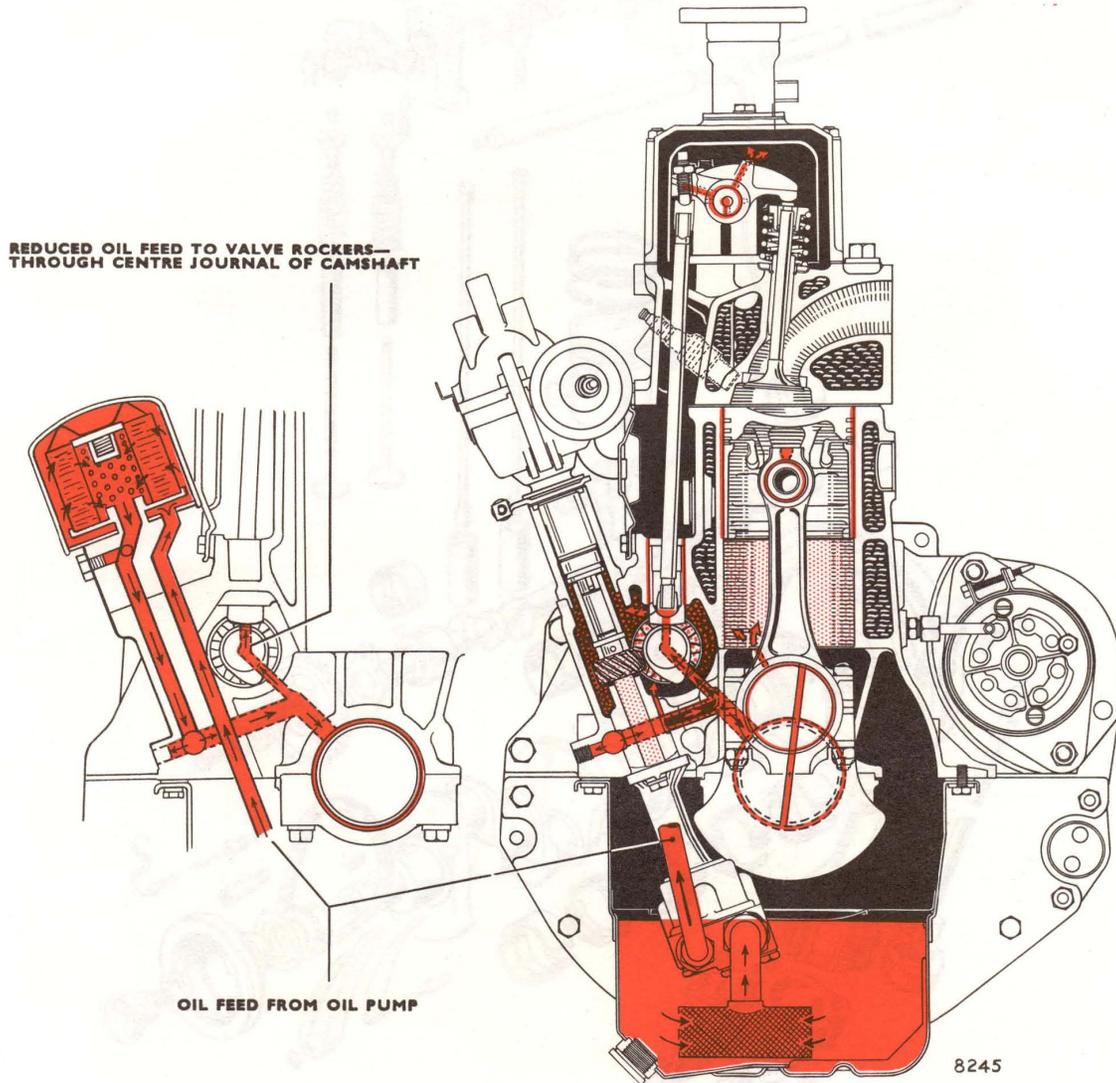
Engine—Cross section of engine with aluminium cylinder head.
